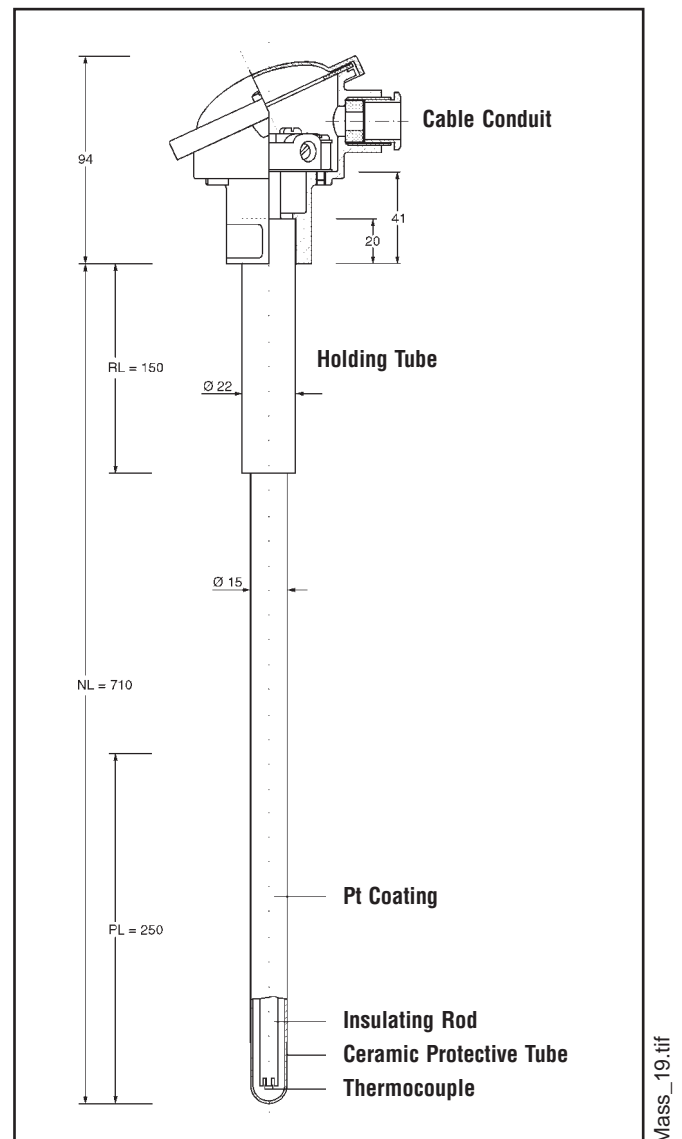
Dimensional drawing – thermocouple with Pt-coated protective tube.
